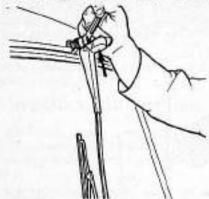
To remove wiper arm, pull top of arm forward as shown and remove nut retaining arm to motor shaft. Remove wiper arm complete with wiper blade.
